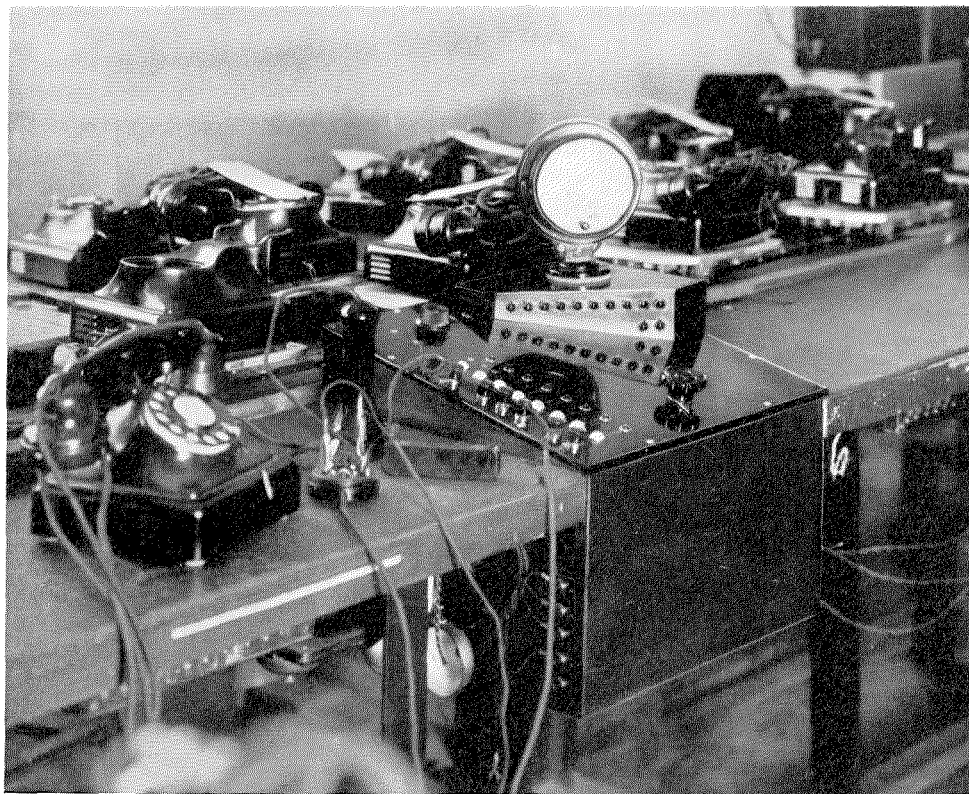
Testing Fixture for Assembled Subscriber Sets.
